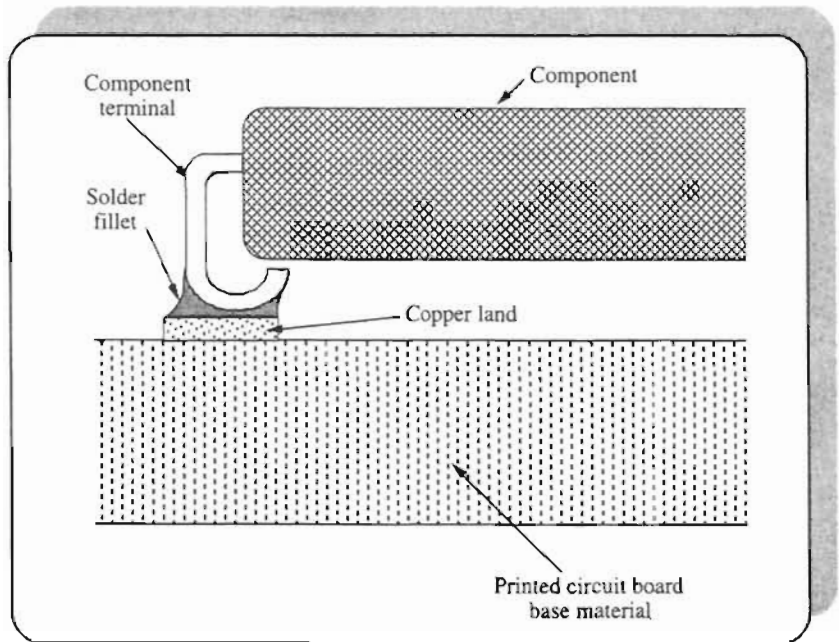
Compliant butt joint, formed when soldering a J-leaded surface mounted component
